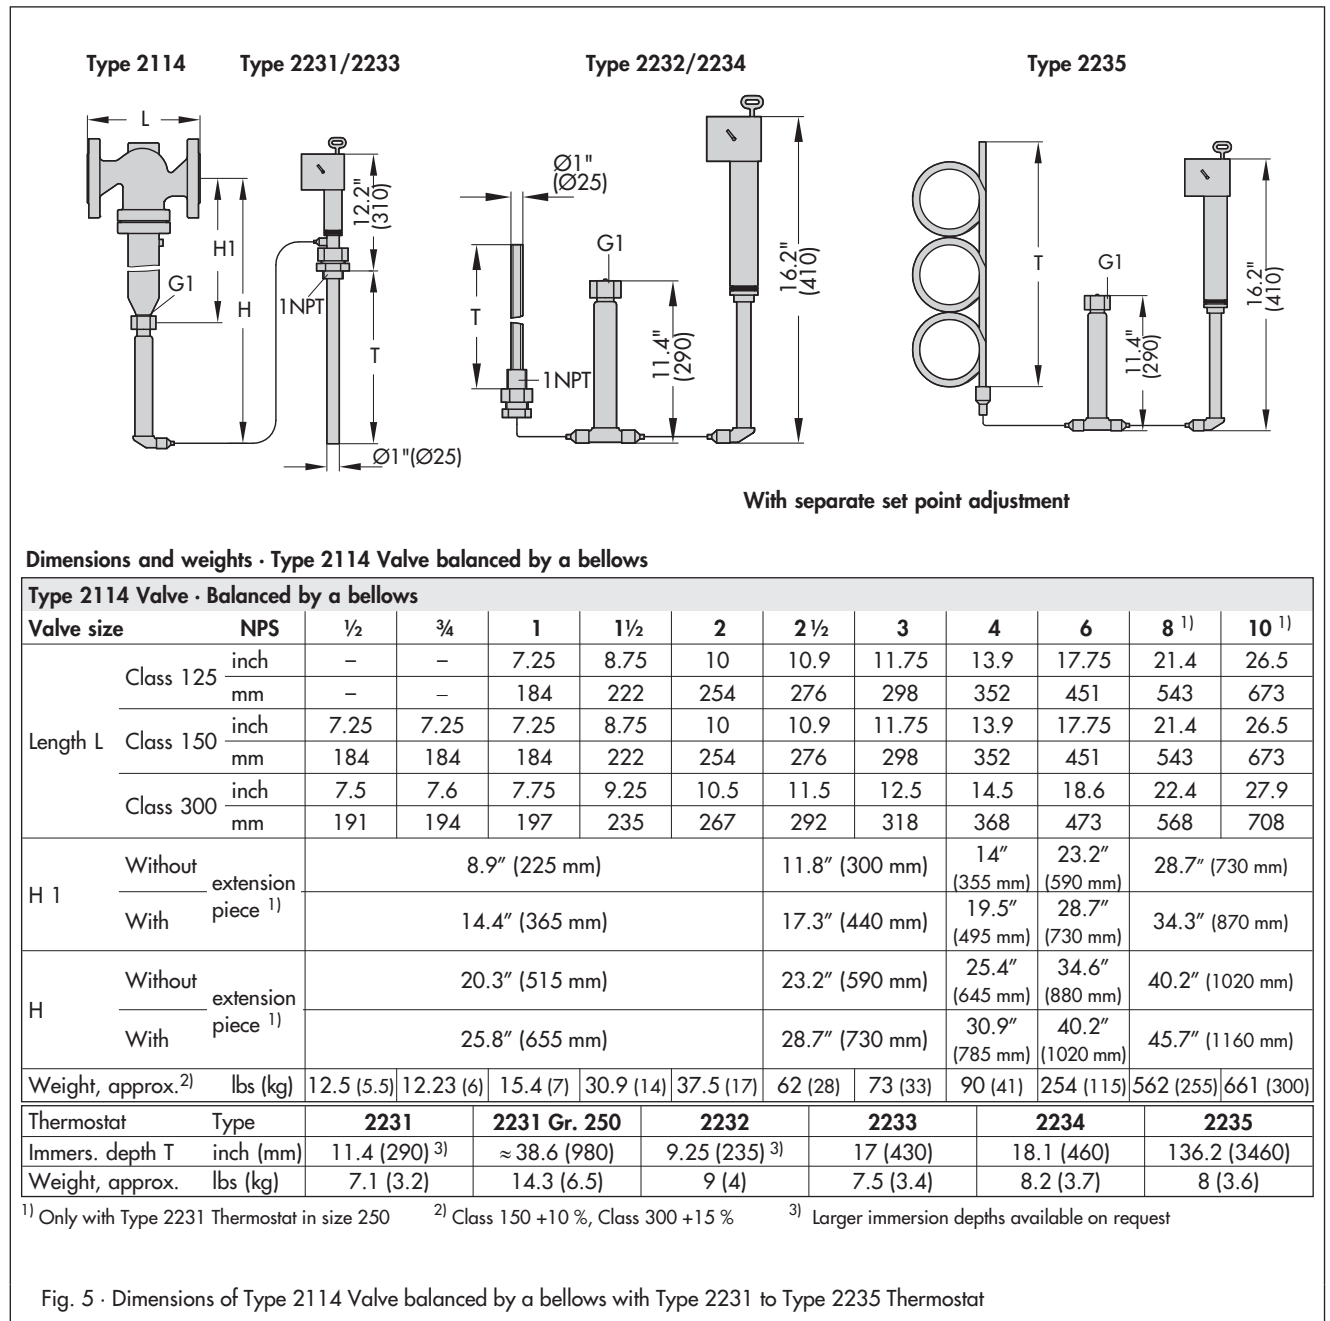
· Dimensions of Type 2114 Valve balanced by a bellows with Type 2231 to Type 2235 Thermostat
